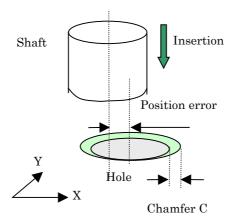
(c) When inserting workpiece in a hole (when an error occurs in two directions)
